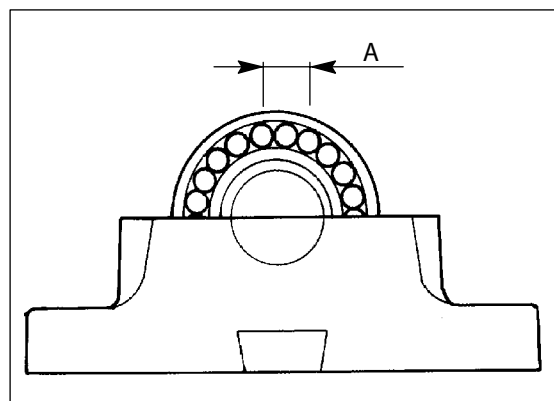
Push the feeler gauge between the rollers and outer ring.
